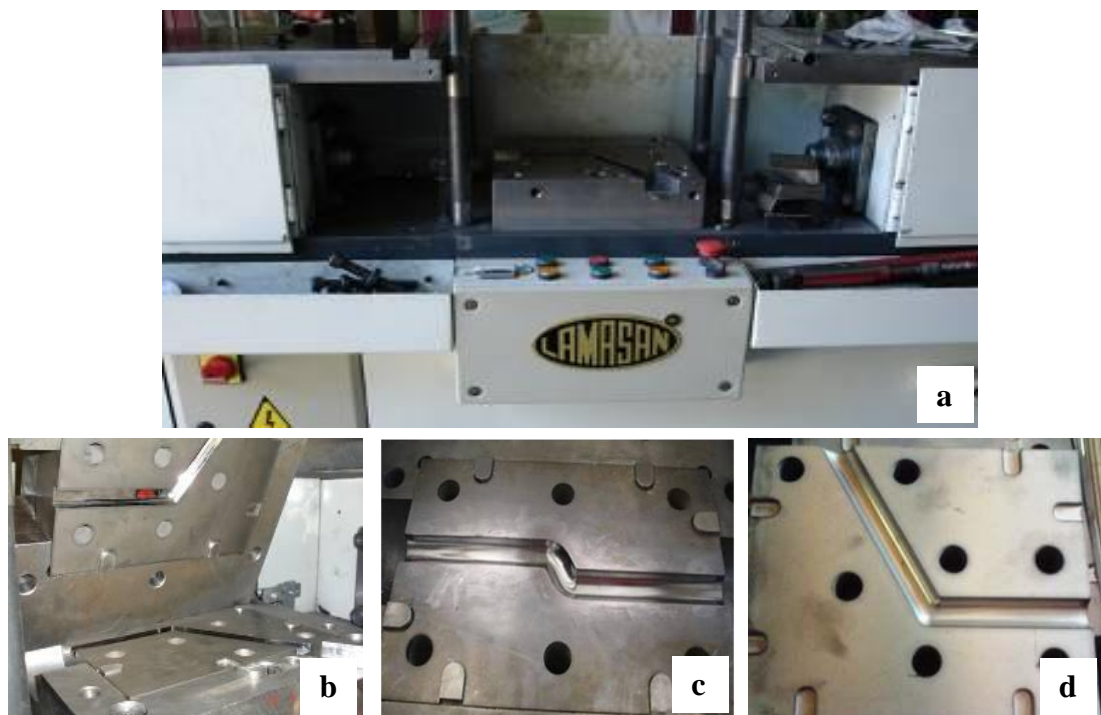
a) Horizontal axis press, b,c,d) ECAP dies (14x14mm square cross-section, 120°; Ø =18mm circular cross-section, double 120°; Ø =18mm circular cross-section, 120°)
